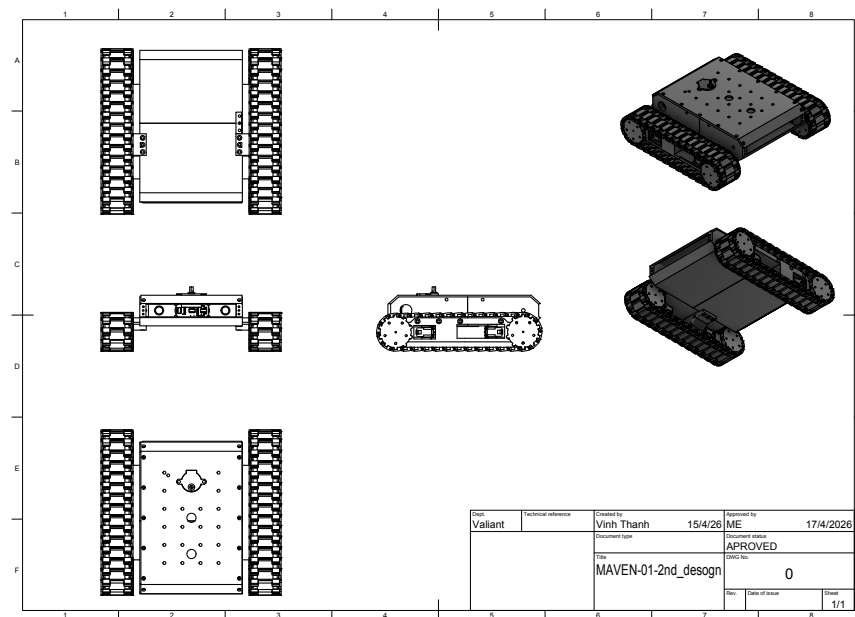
MAVEN-01 second prototype design using separate chassis with chained tracks (Single motor chassis)
